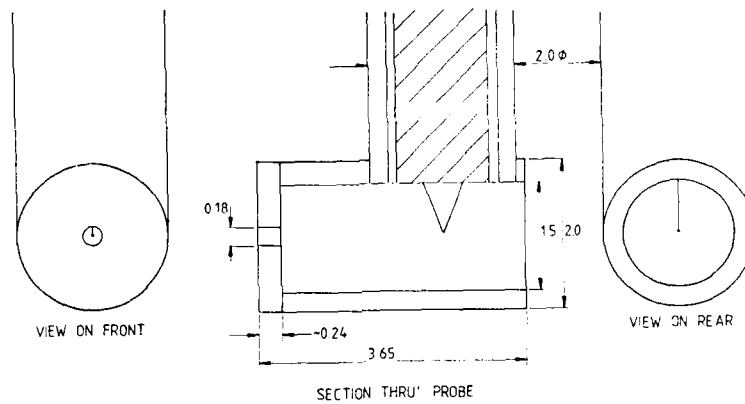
DESIGN DETAILS OF THE DATUM REVERSE - KIEL PROBE
